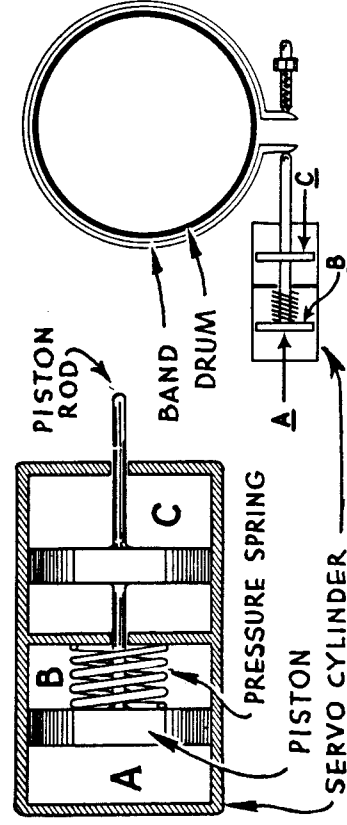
Hydraulic-pressure cylinder and schematic diagram of mechanism for setting band to internal gear drum.
